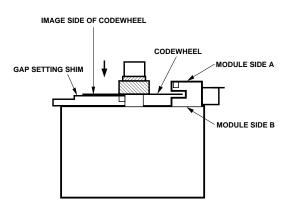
Alignment Tool is Used to Set Height of Codewheel.
